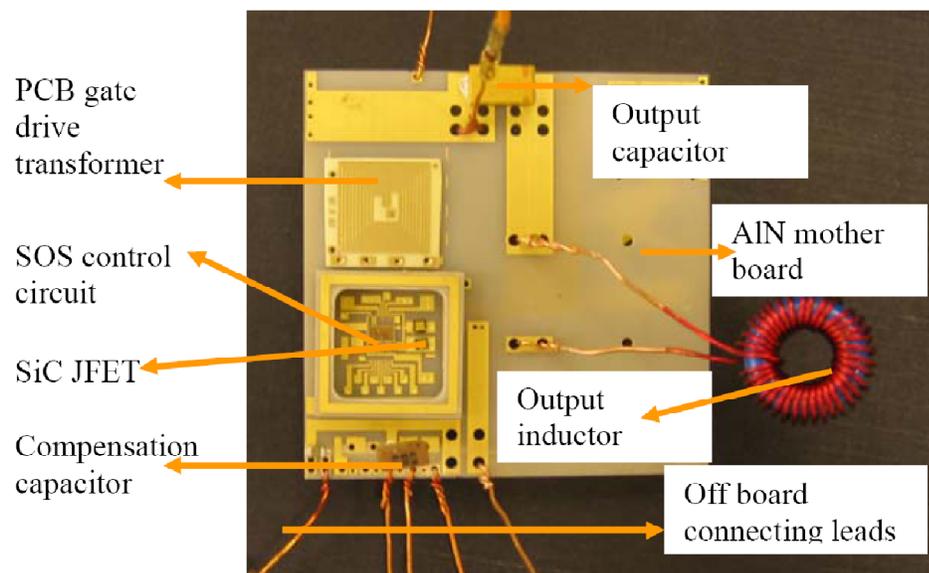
1.8'' × 1.8'' Assembled 275°C SMPS circuit board with testing connections
